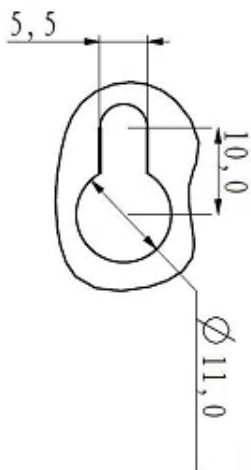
Dimensions: front side with key holes (KBox C-102-4)
